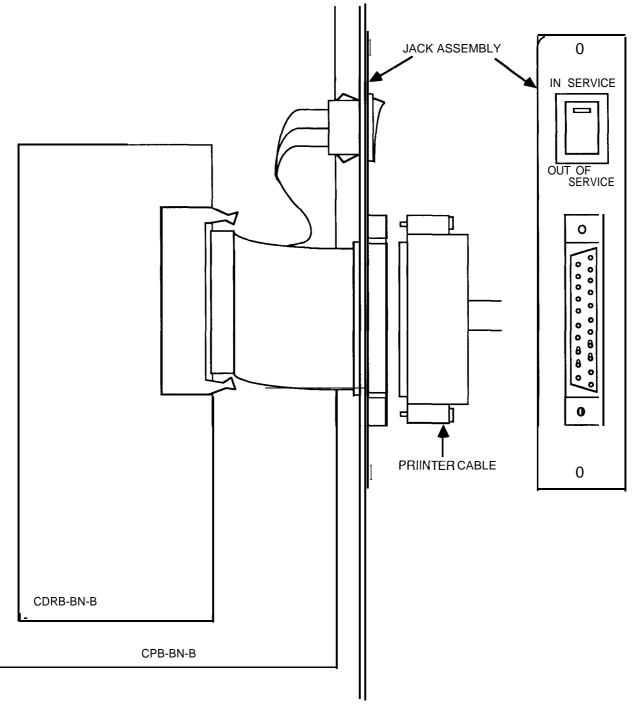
MOUNTING OF JACK ASSEMBLY
